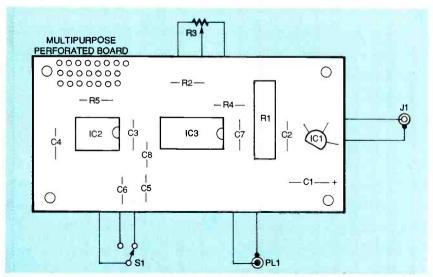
USE THIS AS A GUIDE for positioning the parts on the perforated construction board.
